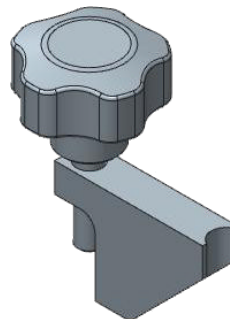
Adapter 3282-64, up! from 2012, 5 gear shift gearbox OCF
